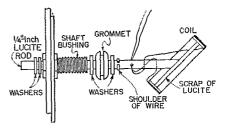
Details of the adjustable antenna coupling coil. Part of the coil has been cut away to show the support.
